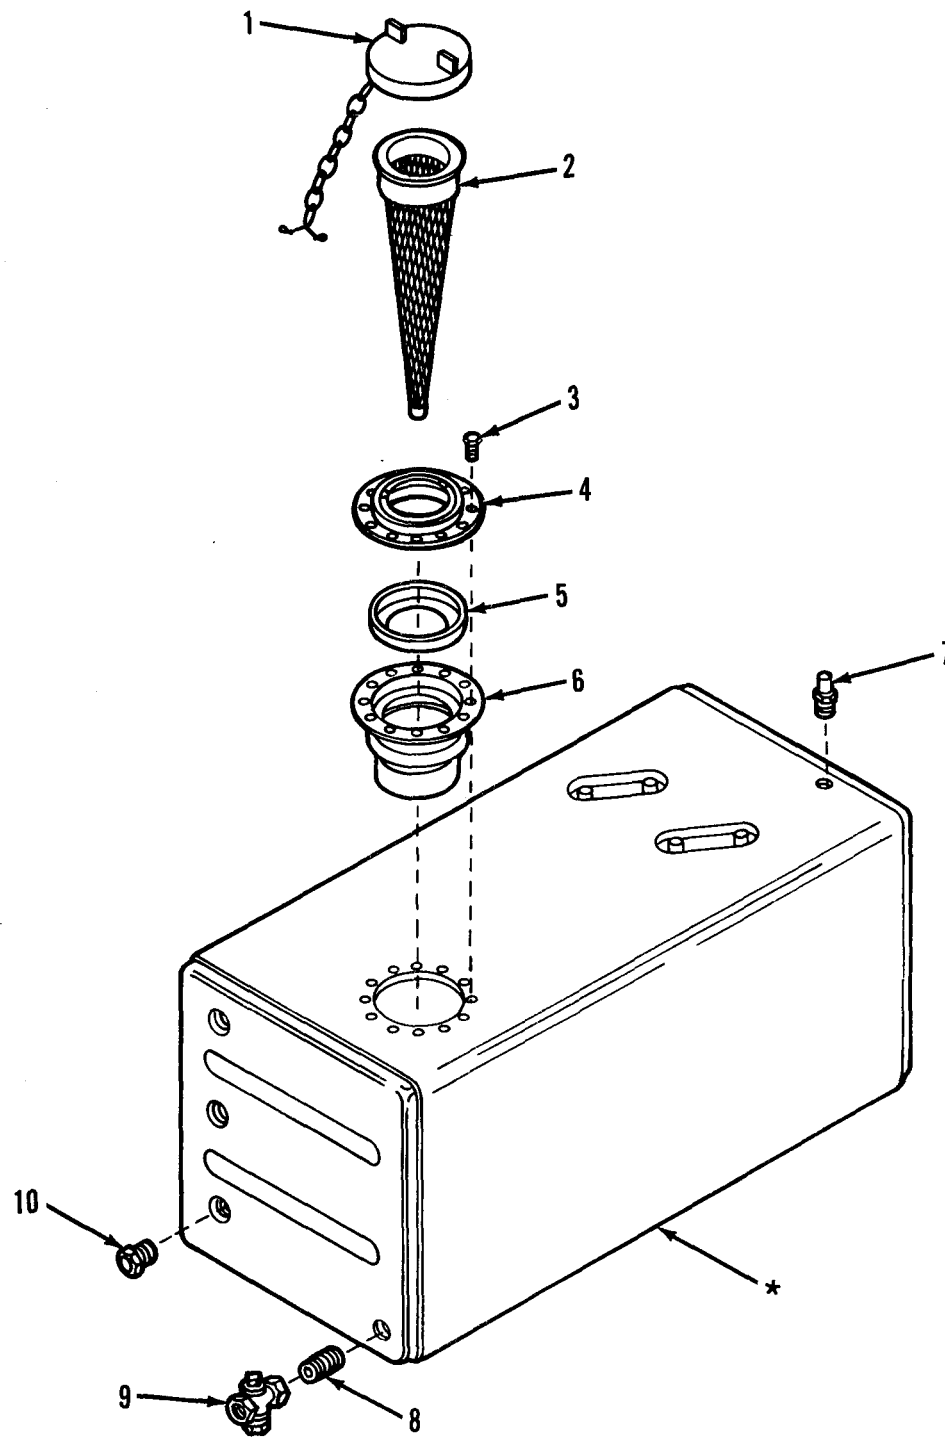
Tank, Liquid Dispenser, 31-15-2806
